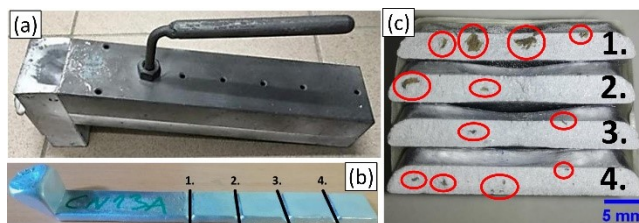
(a) K-mold, (b) K-mold sample and (c) inclusions on the fracture surfaces
